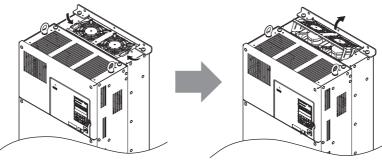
Removing the Cooling Fan Cover: 4A0088 and 4A0103
